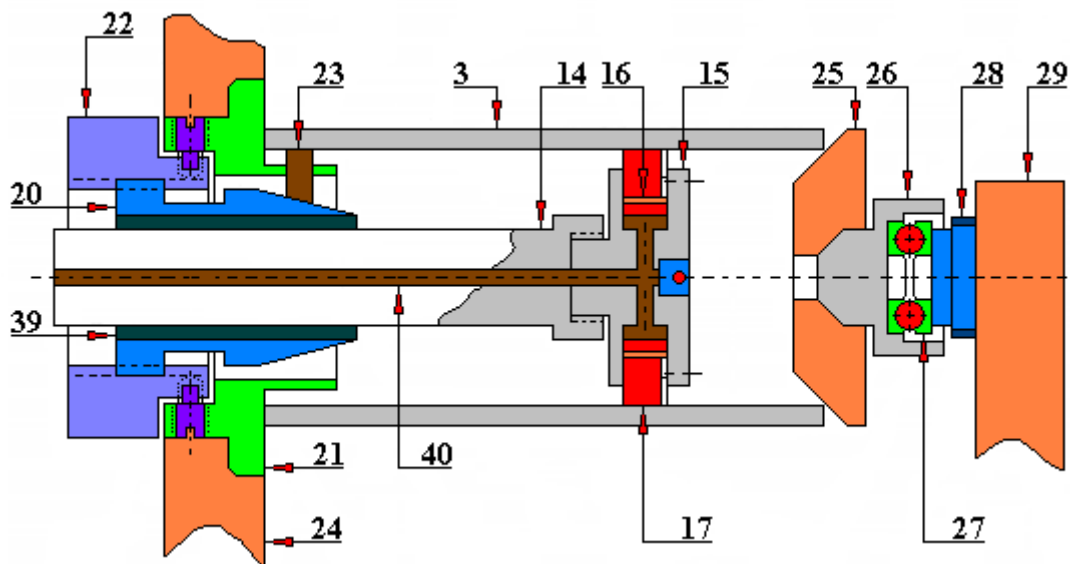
A cross-section of the assembly of mounting the cylinder liner of the test rig for testing the wear of piston rings according to the patent PL 154 209 (the description below applies to figures 4.1.58.1 and 4.1.58.2).
